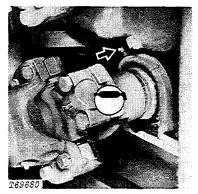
Lower Drive Shaft Support Bearing (1 Point)
